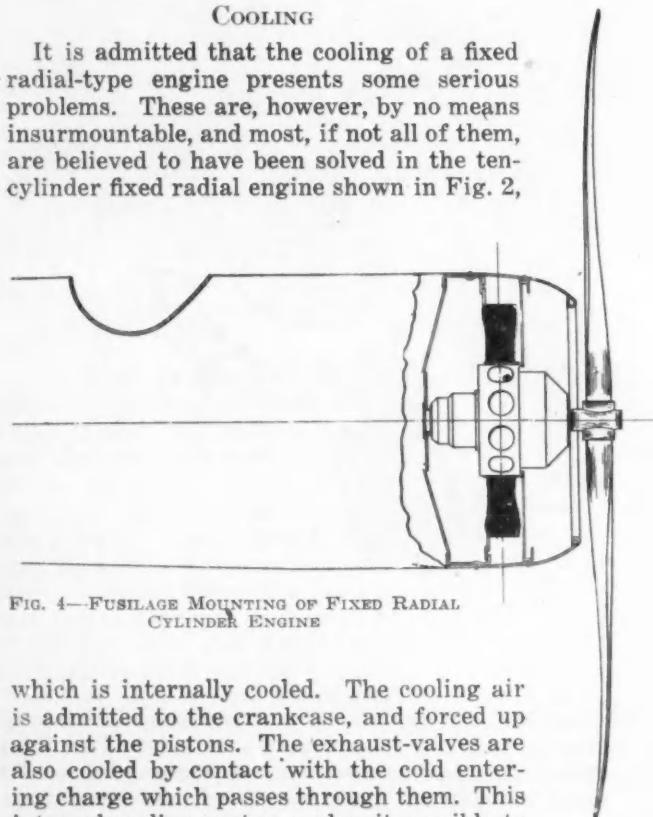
FUSILAGE MOUNTING OF FIXED RADIAL CYLINDER ENGINE
